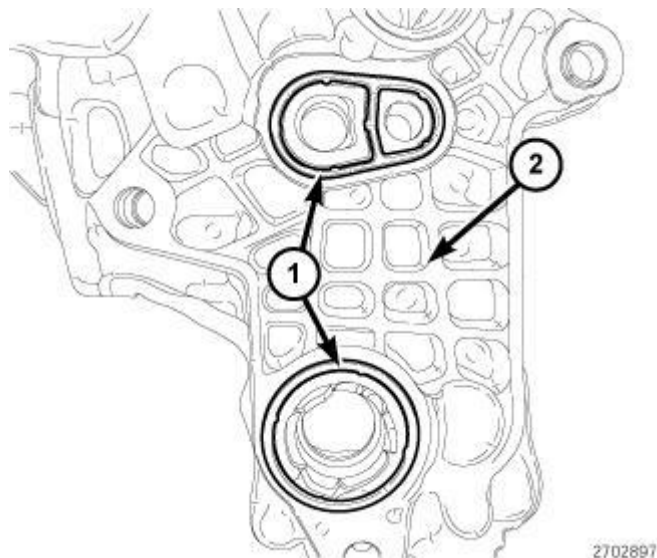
O-RING SEALS & OIL FILTER HOUSING
